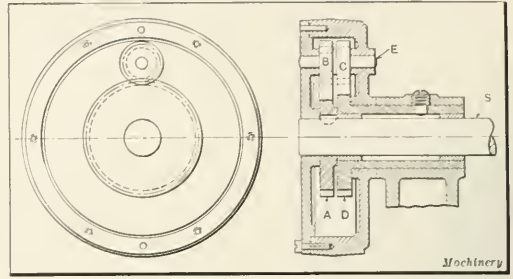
Epicyclic Gear Train consisting of Two Central Gears (One of which is stationary) and an Arm which carries Two Planetary Gears
